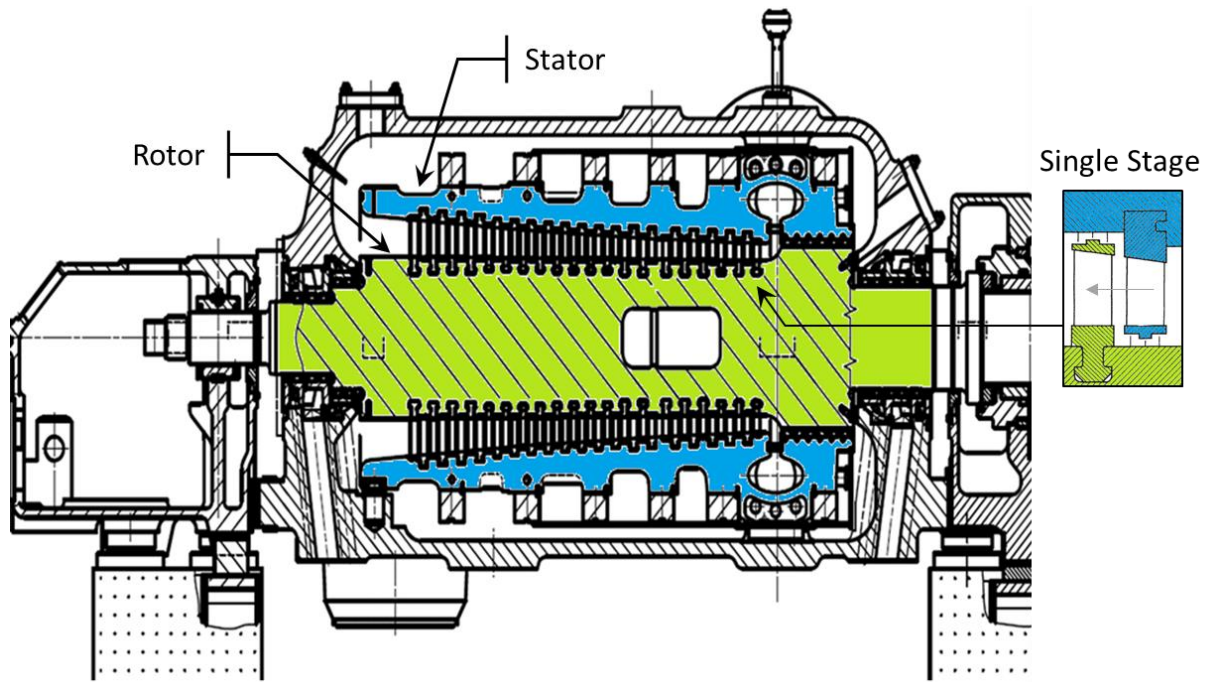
HP Steam Turbine Cross Section - Adapted from [6]
